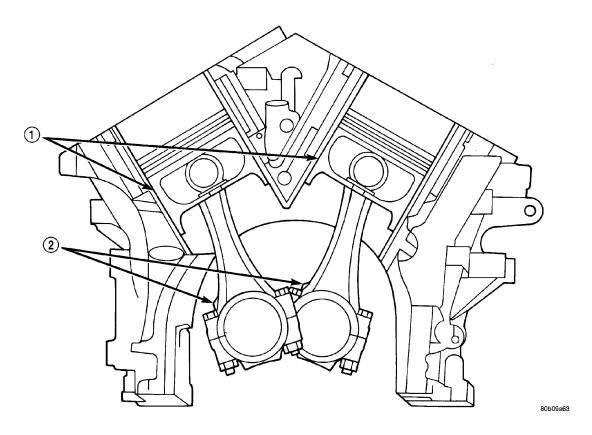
Piston & Connecting Rod Positioning (Front View of Engine)
